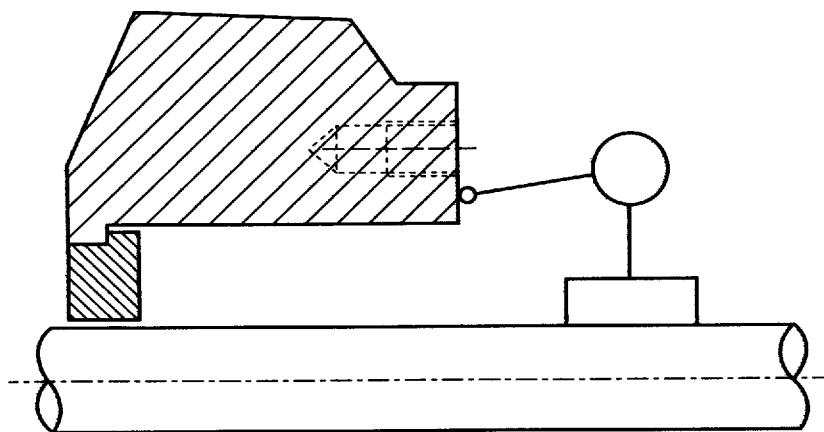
Seal Chamber Face Runout (2.7.3.13)
